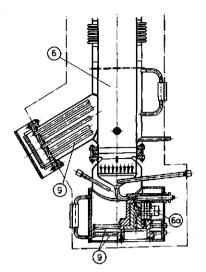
Details in Fig. 2.18 6 Lower end of the VK tube 6a Extrusion gear pump 9 Electric heating rods
